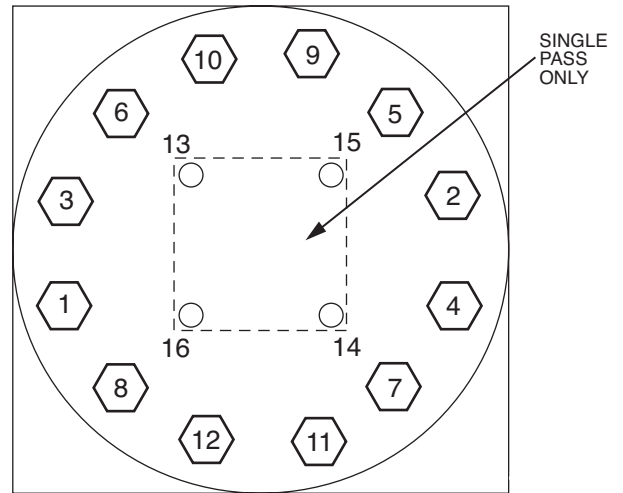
Flooded Cooler Unit Head Recommended Bolt Torque Sequence
